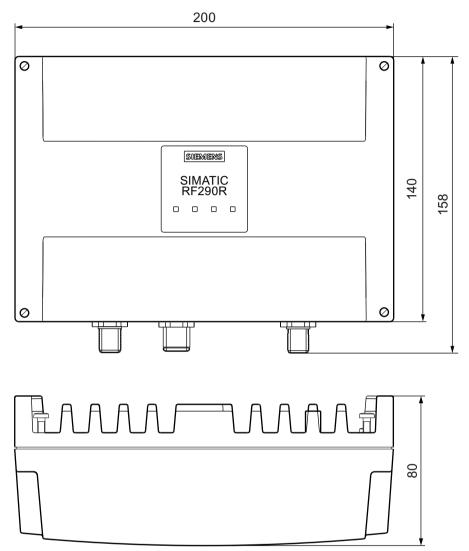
Dimensional drawing RF290R (dimensions in mm)
